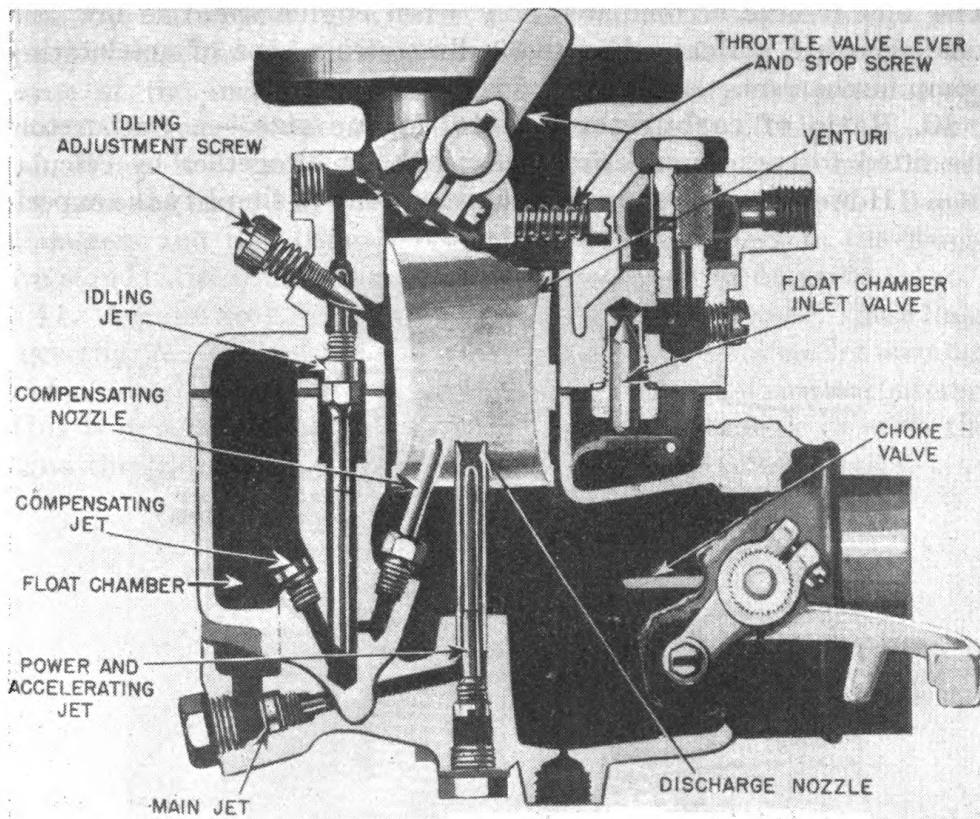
Compensating compound nozzle type updraft carburetor (section through the body).
